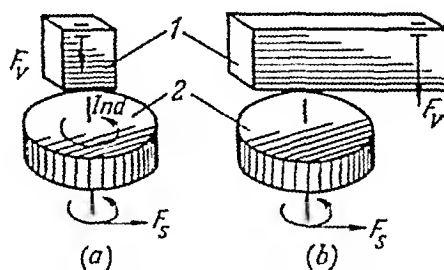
Examples in which the size of the cutting tool affects the operative motions
